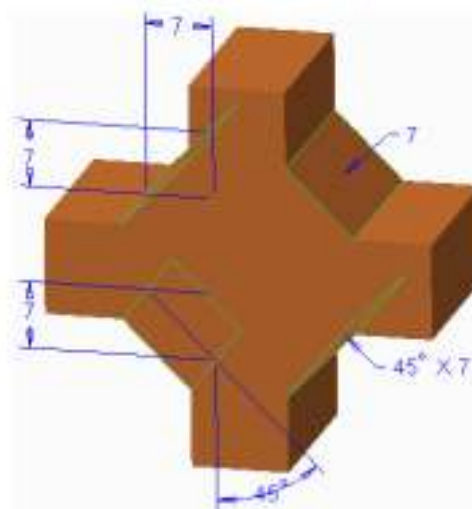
Four Different Chamfer Dimensioning Schemes with the Same Geometry
